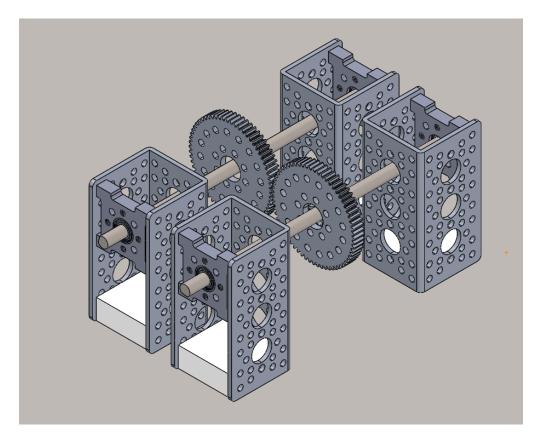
CAD of one system concept. The U-channels, gears, shafts, and bearing blocks are all standard parts sold by robotic part suppliers. The white block would be manufactured by us and has an embedded magnet.
